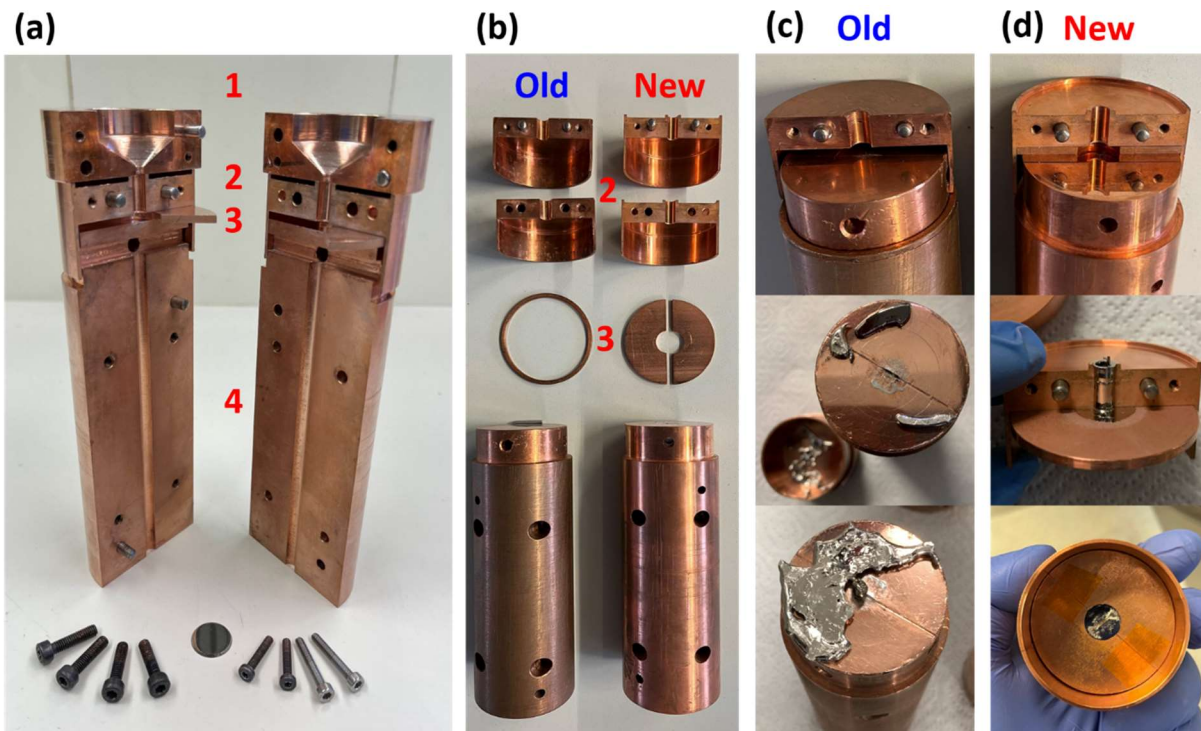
(a) The final design of the copper mold and a Ti-BMG disk in the center. (b) Disassembly photo of old and new copper molds. A detail view of casting space in the mold and the final casting products of the (c) old and (d) new designs.
